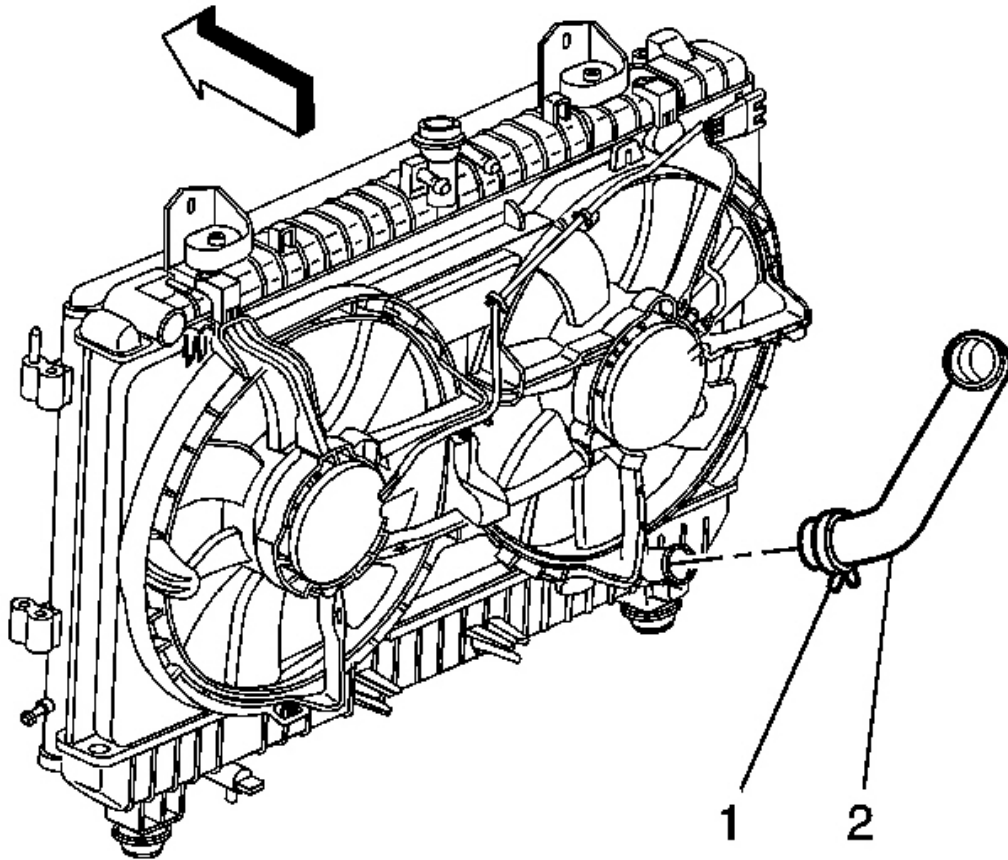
Radiator Outlet Hose & Clamp At Radiator
